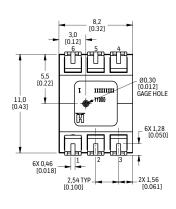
SMT PACKAGE DIMENSIONAL DRAWINGS (FOR REFERENCE ONLY: MM [IN].)
